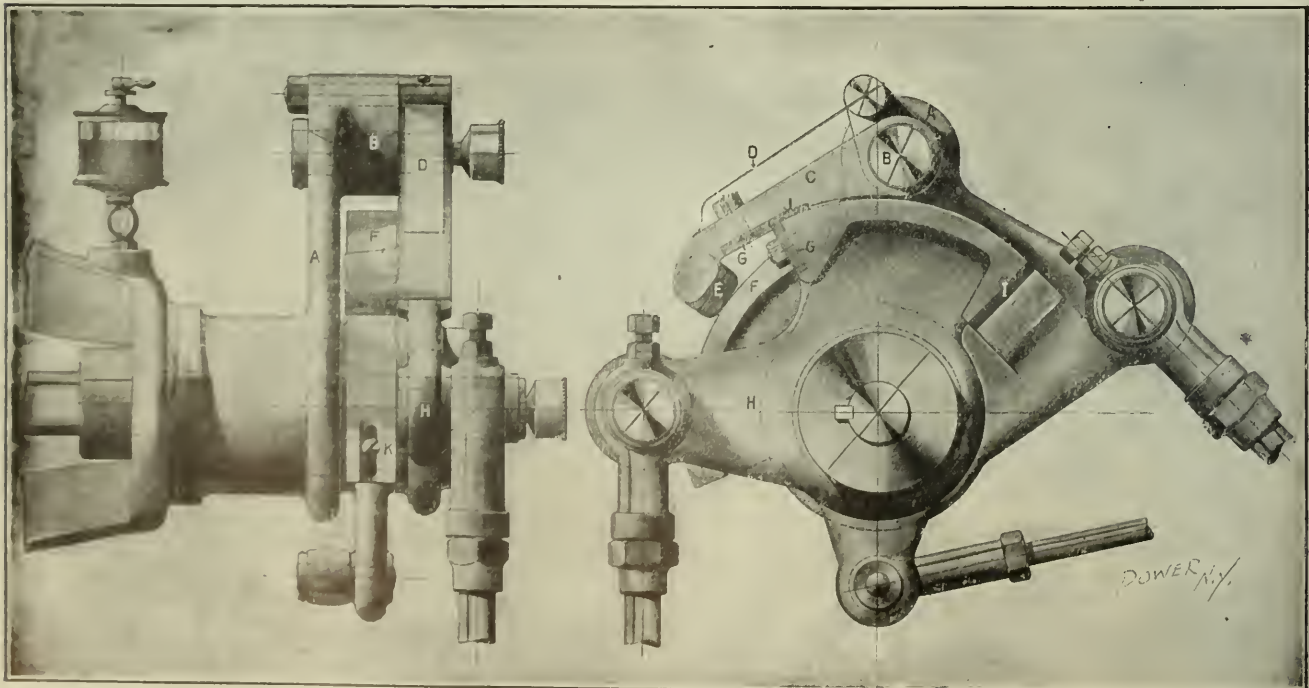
DETAILS OF THE FRANKLIN VALVE GEAR
